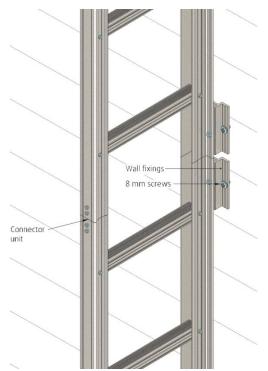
Assembling principle for the ladder and for wall fixings. Stair width and stair distance is approx. 300 mm.
